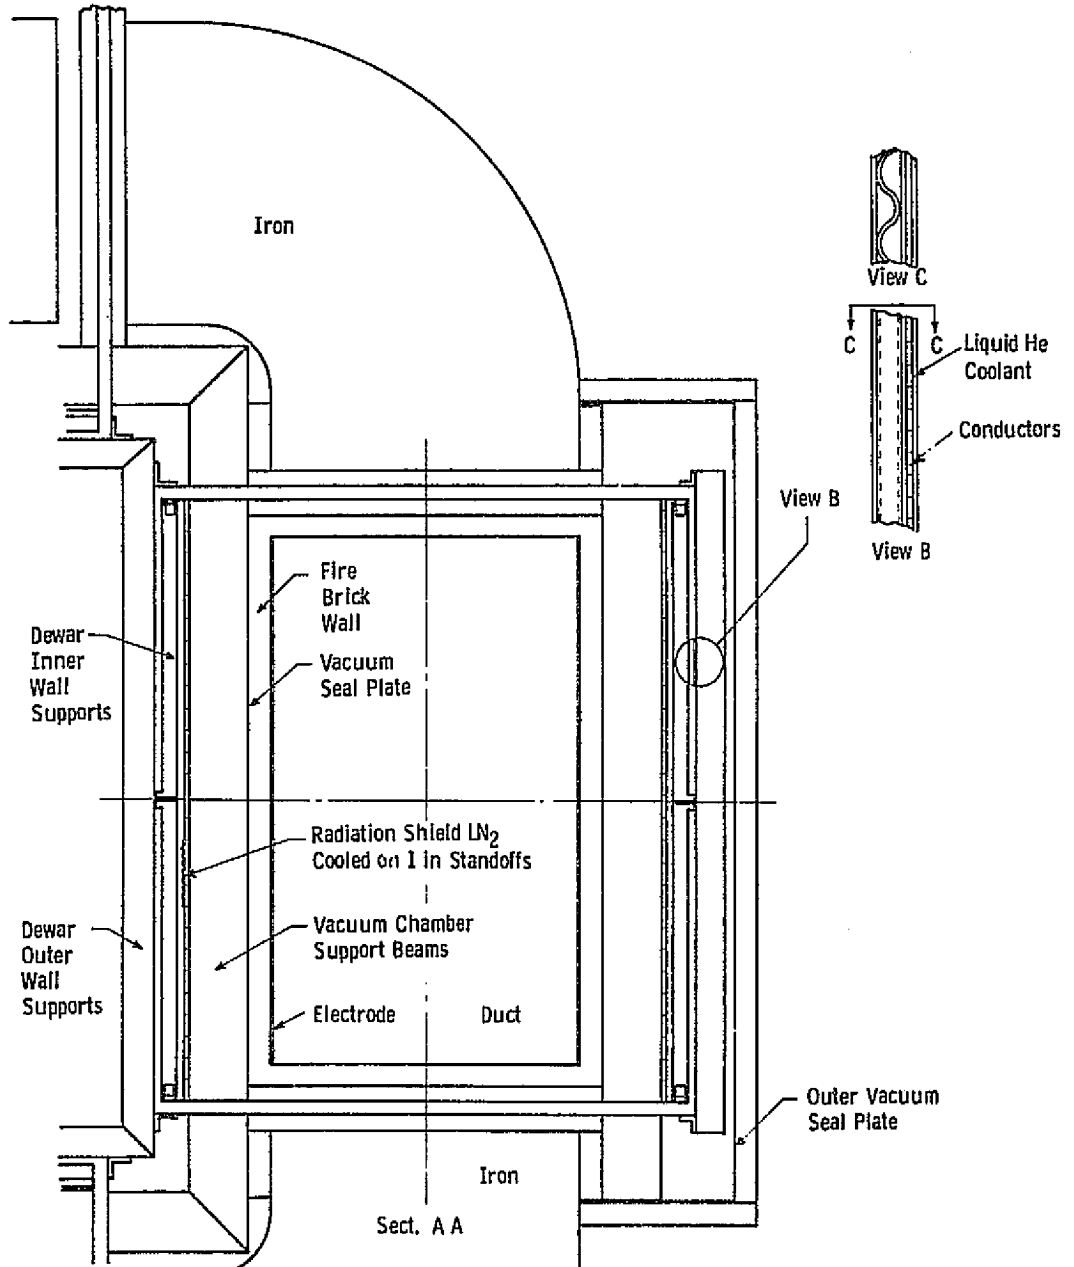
Sectional view of liquid metal MHD magnet design
